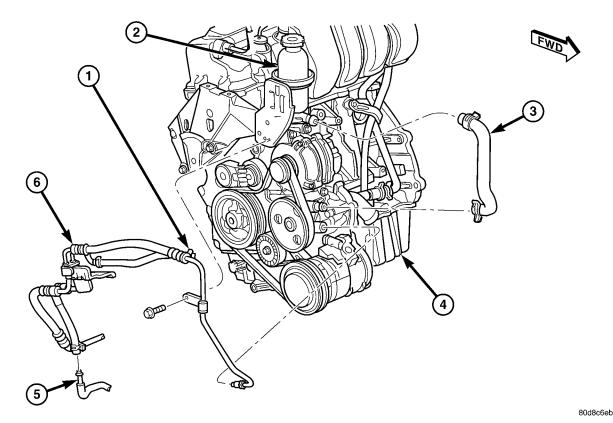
Hoses, Reservoir And Pump - 1.6L Engine
